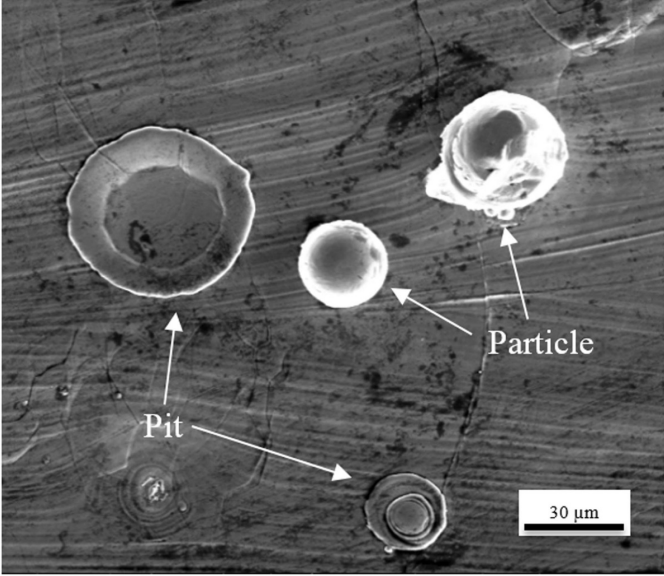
Defects caused by mass transfer showing both the welded particles and the pits where removed particles were. [18]
